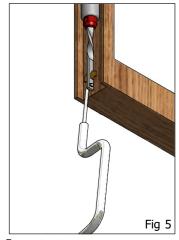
Latch the cross pin into the bracket seat and remove the tension tool.
